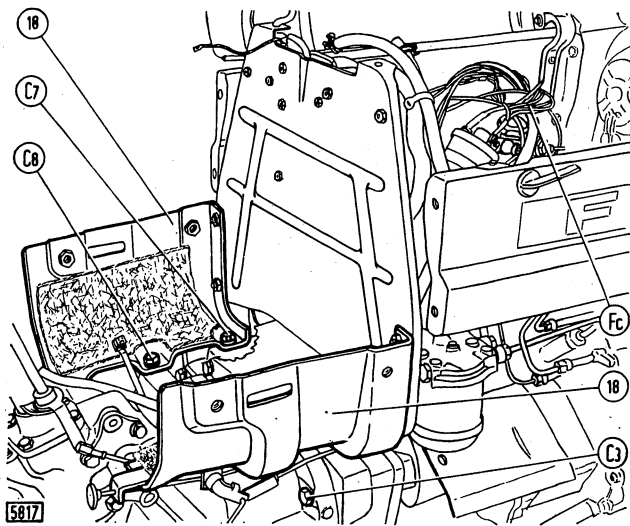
Right-side view of tractor without rear hood and fuel tank.
